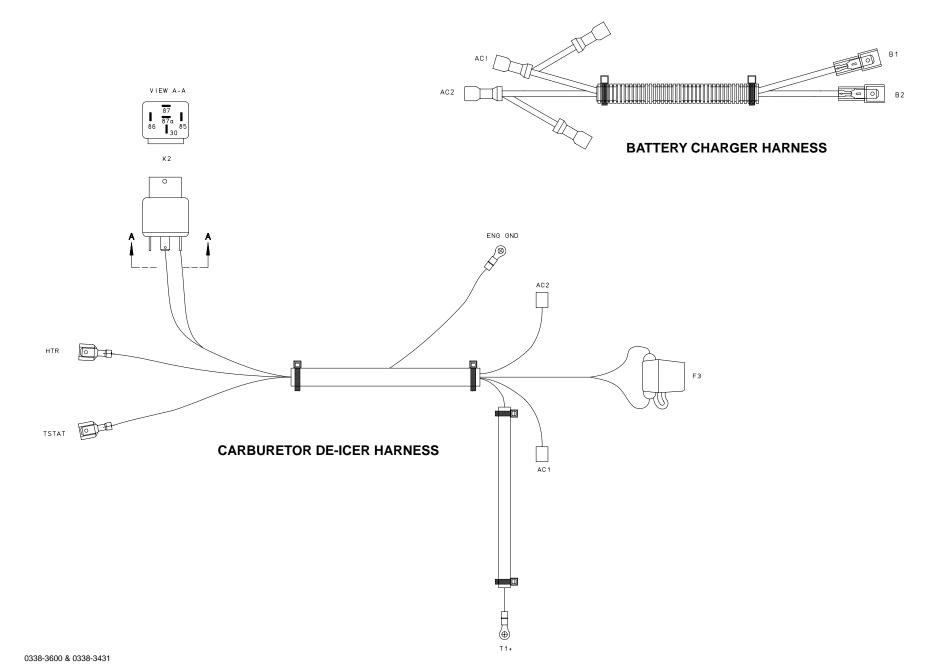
CARBURETOR DE-ICER AND BATTERY CHARGER WIRING HARNESSES
